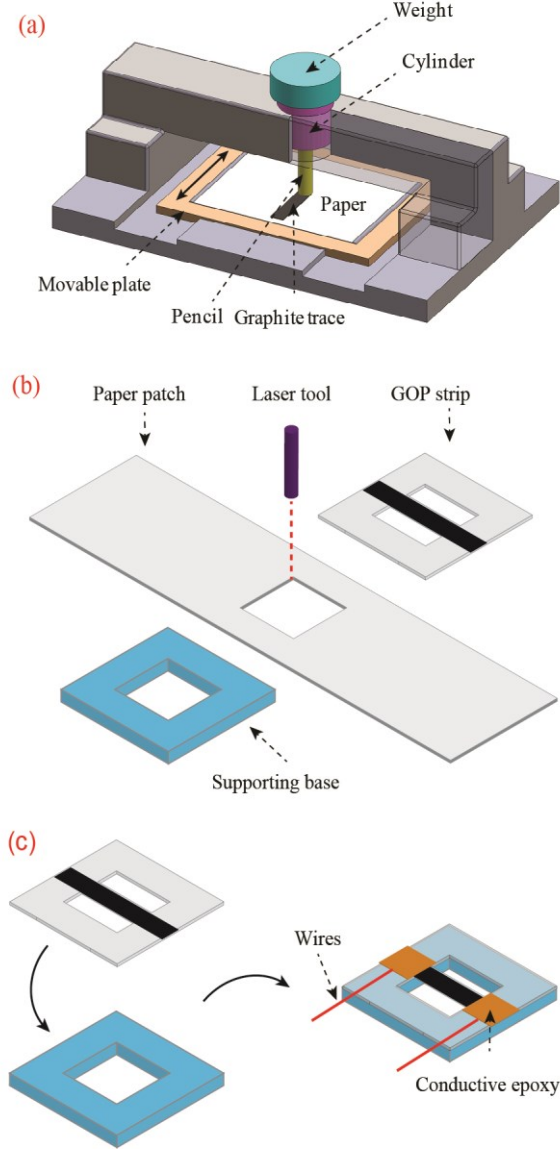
Fabrication process of the flexible flow sensors using a pencil drawing technique and a laser cutting method. (a) Drawing pencil trace on paper (b) Cutting strips, patches and supporting parts. (c) Assembly of GOP on supporting base and making interconnections.
